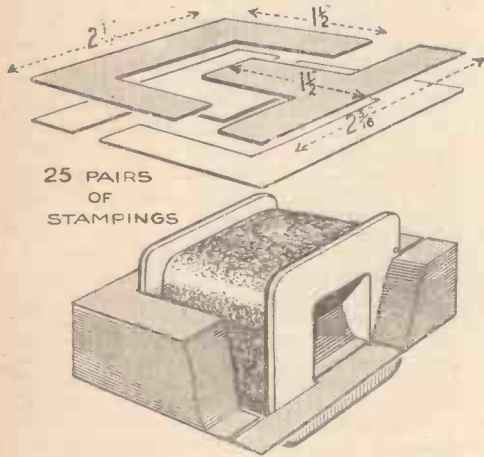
How the T- and U- shaped pieces form the iron core for the bobbin
